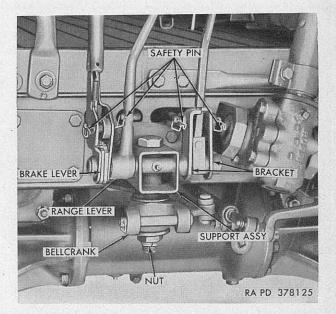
Brake and shift lever support assembly and attached parts mounted on front of platform.
